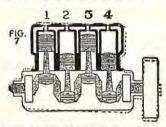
Type of crankshaft which would permit a fourcylinder engine to fire 1, 2, 3, 4, but which is never used.
